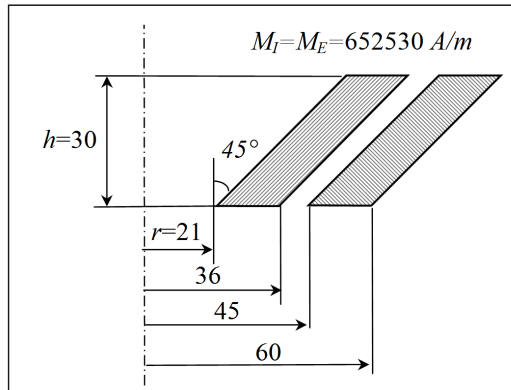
Reference geometry for the V-shaped slide; half section; dimensions are in millimeters.
